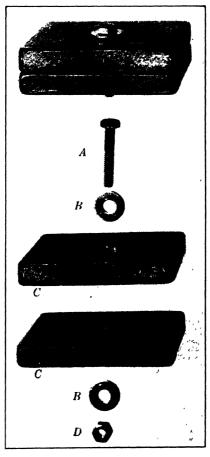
Cast iron plate assembly. A. Machine bolt ½ inch × 1% inches.
